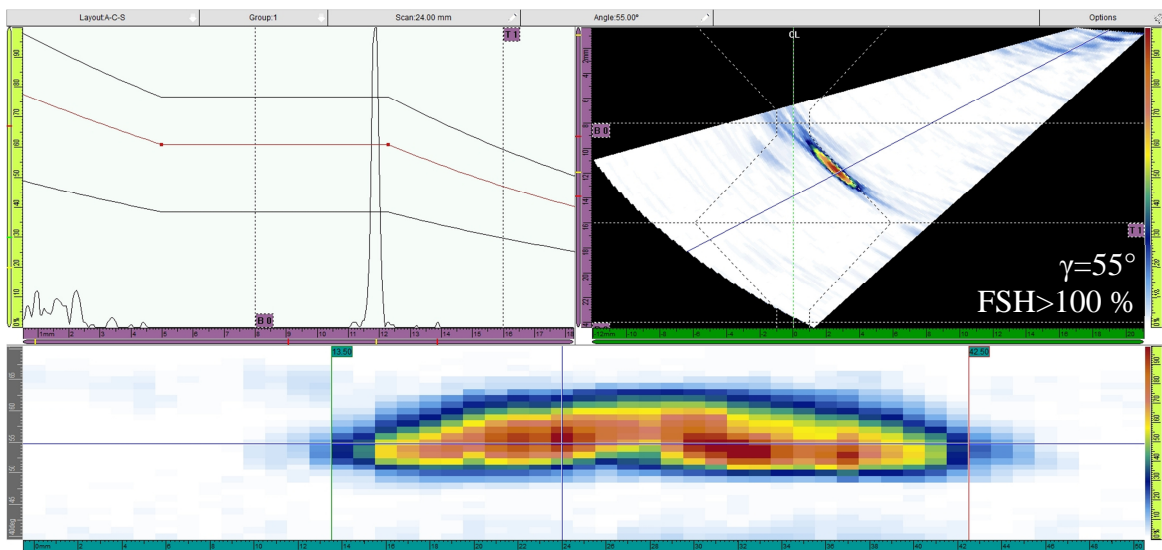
The lack of side-wall fusion on the right side of welded joint, DAC Ø2 mm +8dB (B)
